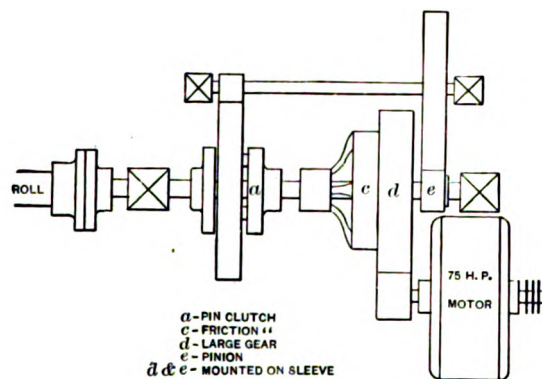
WEBB CALENDER—MECHANISM FOR ONE-MOTOR DRIVE.
